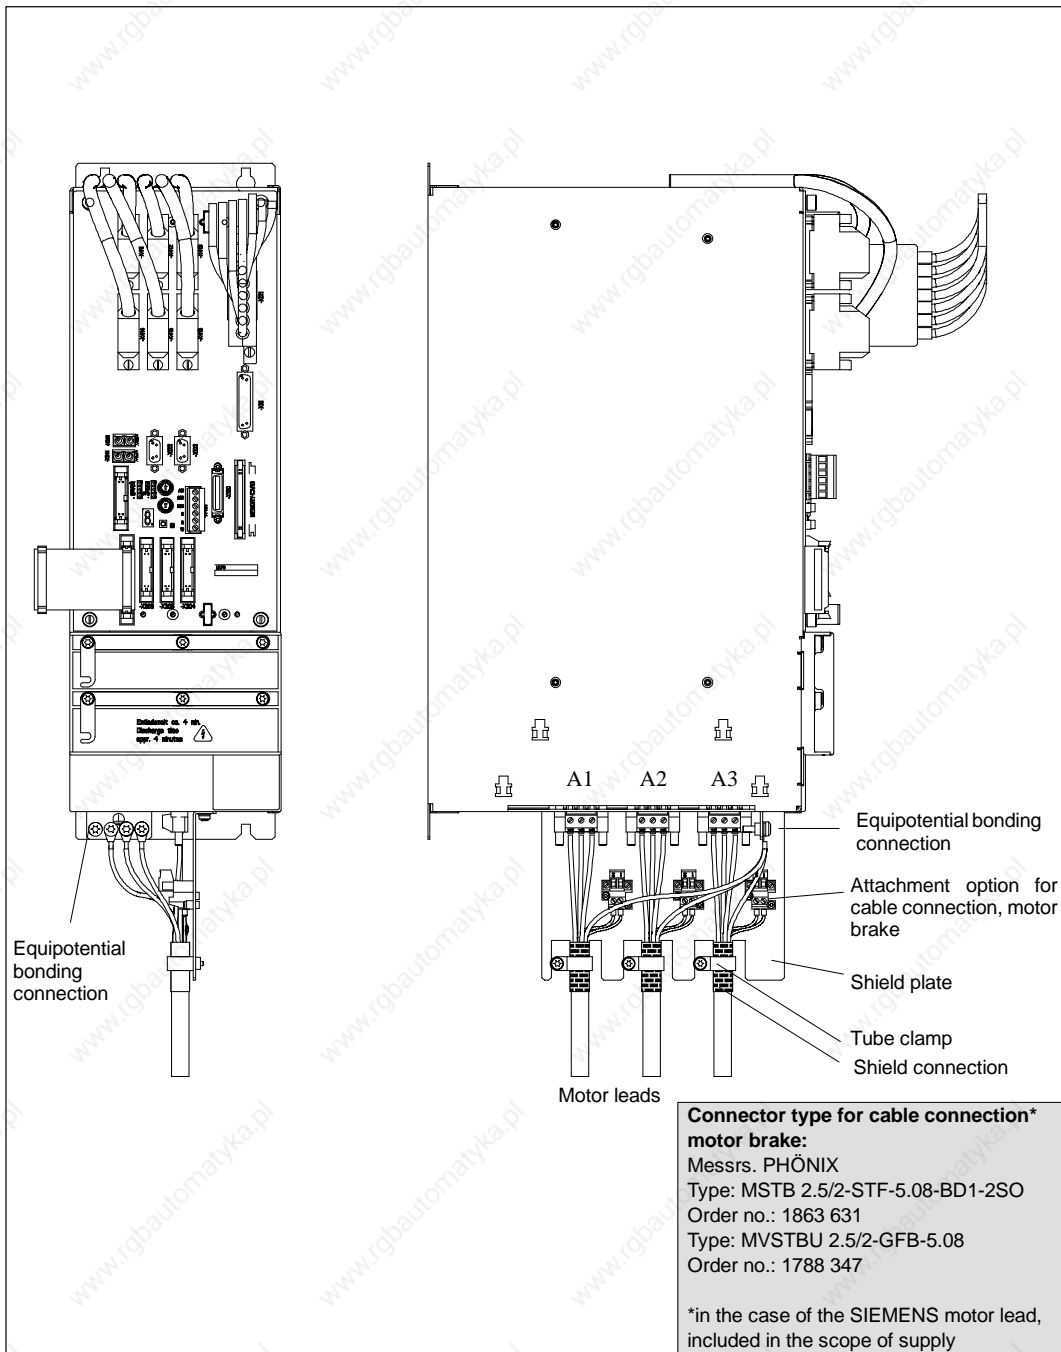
Connecting the motor and encoder leads (3-axis CCU box)
